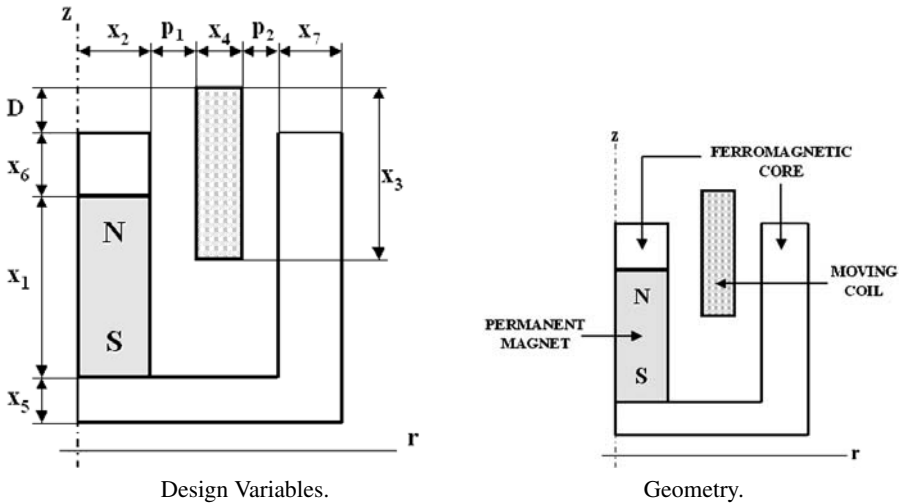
Geometry and design variables of the cylindrical voice-coil actuator
